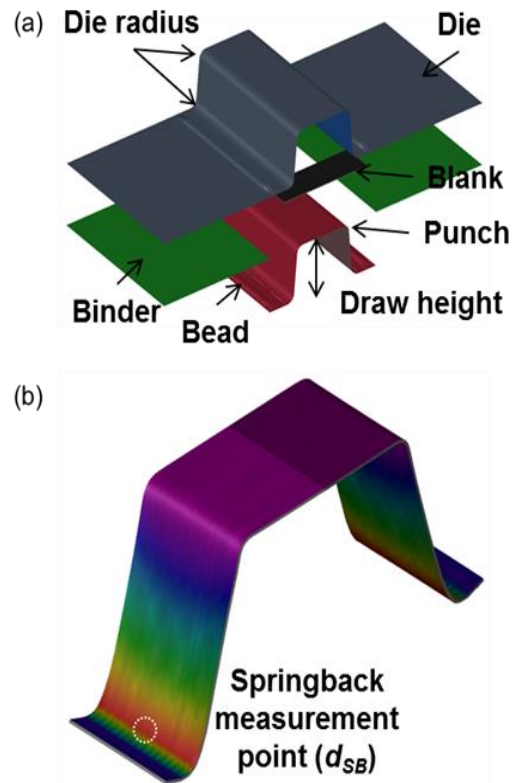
(a) A model configuration of hat-shaped member forming (3D View), (b) example of the hat-shape channel forming after springback
